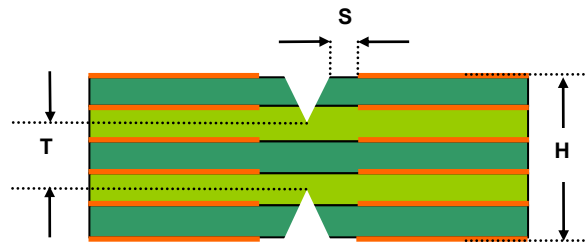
The safe distance (S) between v-cut grooves and copper traces.
